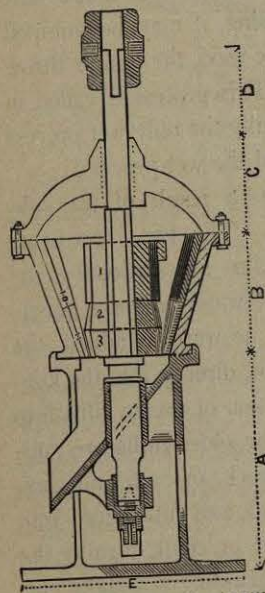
Coffee Mill Cracker. (See p. 712.)
